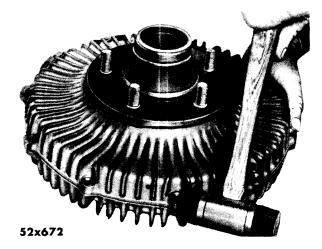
Separating Inner and Outer Housings (Front Disc Brake)
